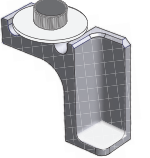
The drawer and its fittings for holding the DUT. The drawer is shown without its telescopic mounting and sealing strip.
